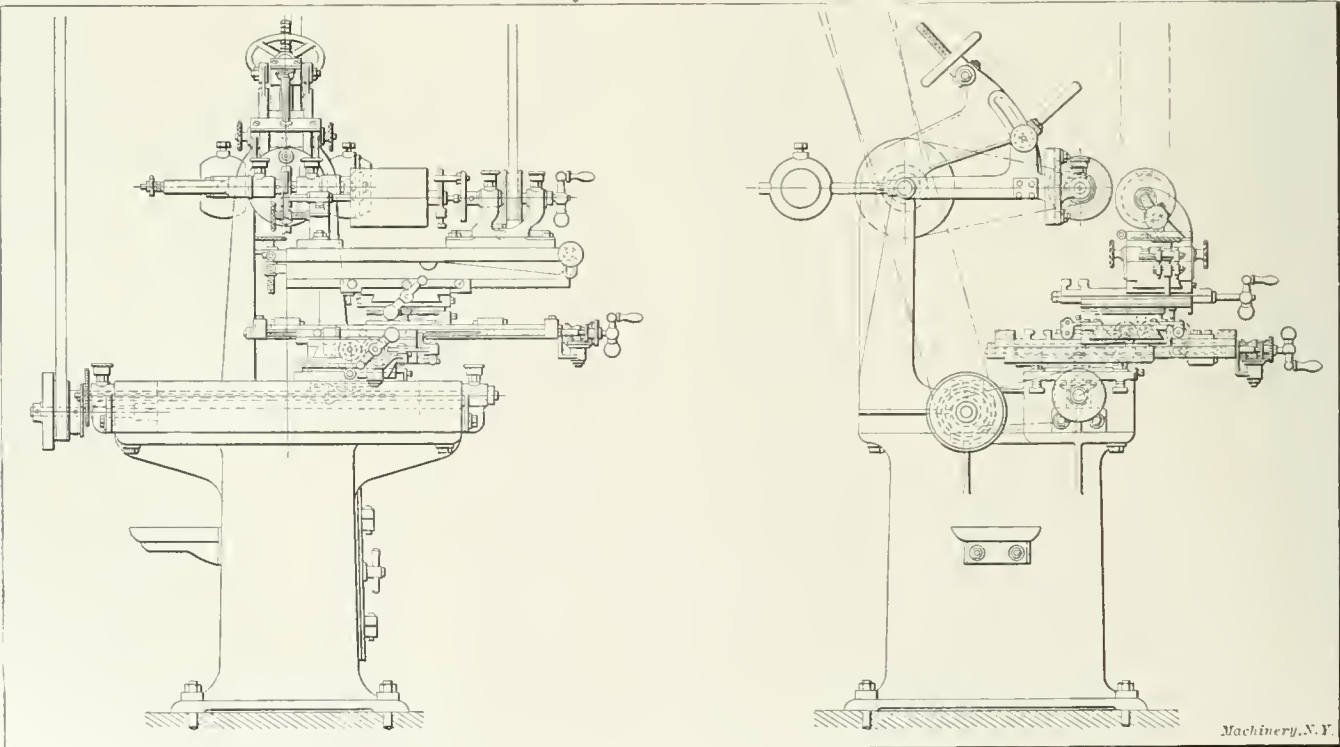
Front and Side Elevations of German Universal Grinding Machine
